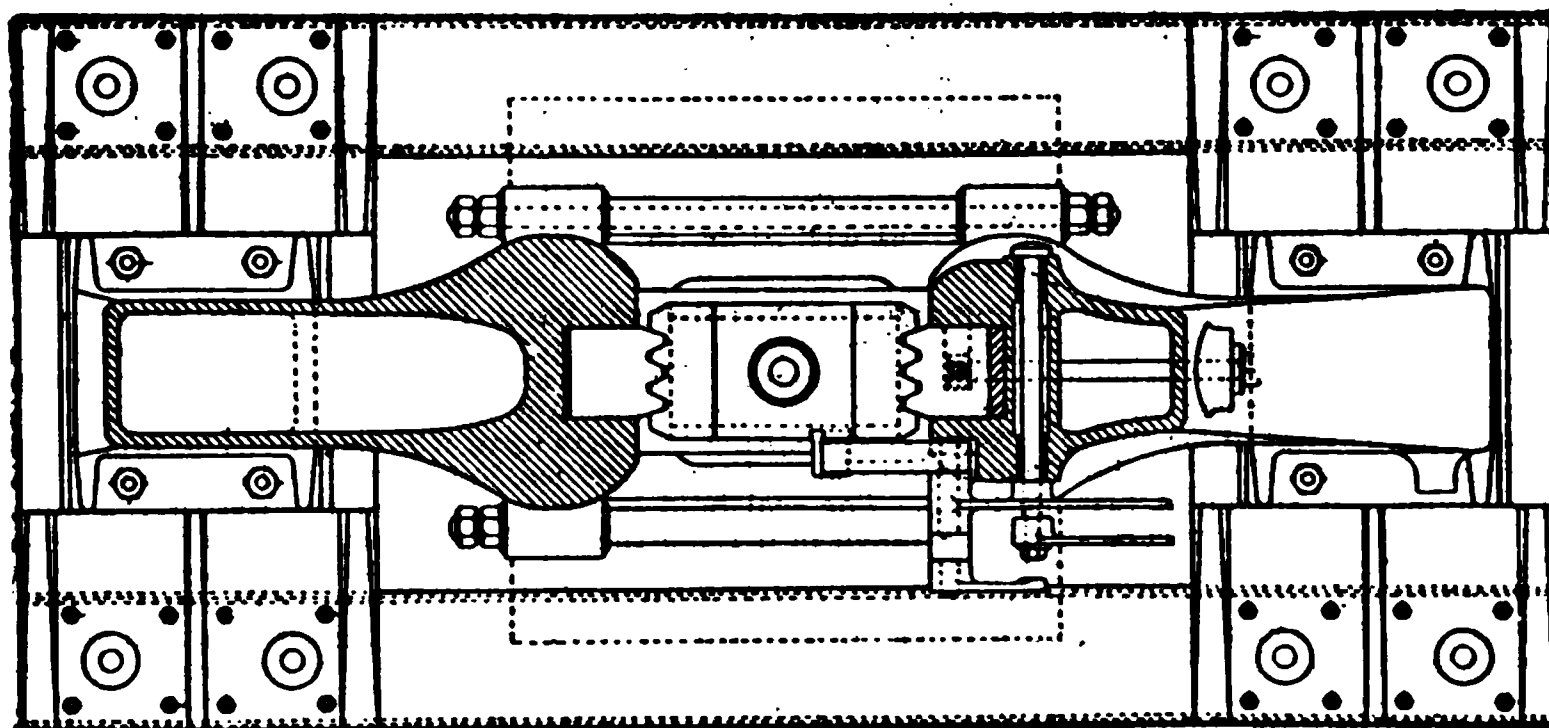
,626.—Cross section of large double frame hammer. On this hammer work is confined to the making of forgings, and in this process forgings are only worked crosswise of the die.
